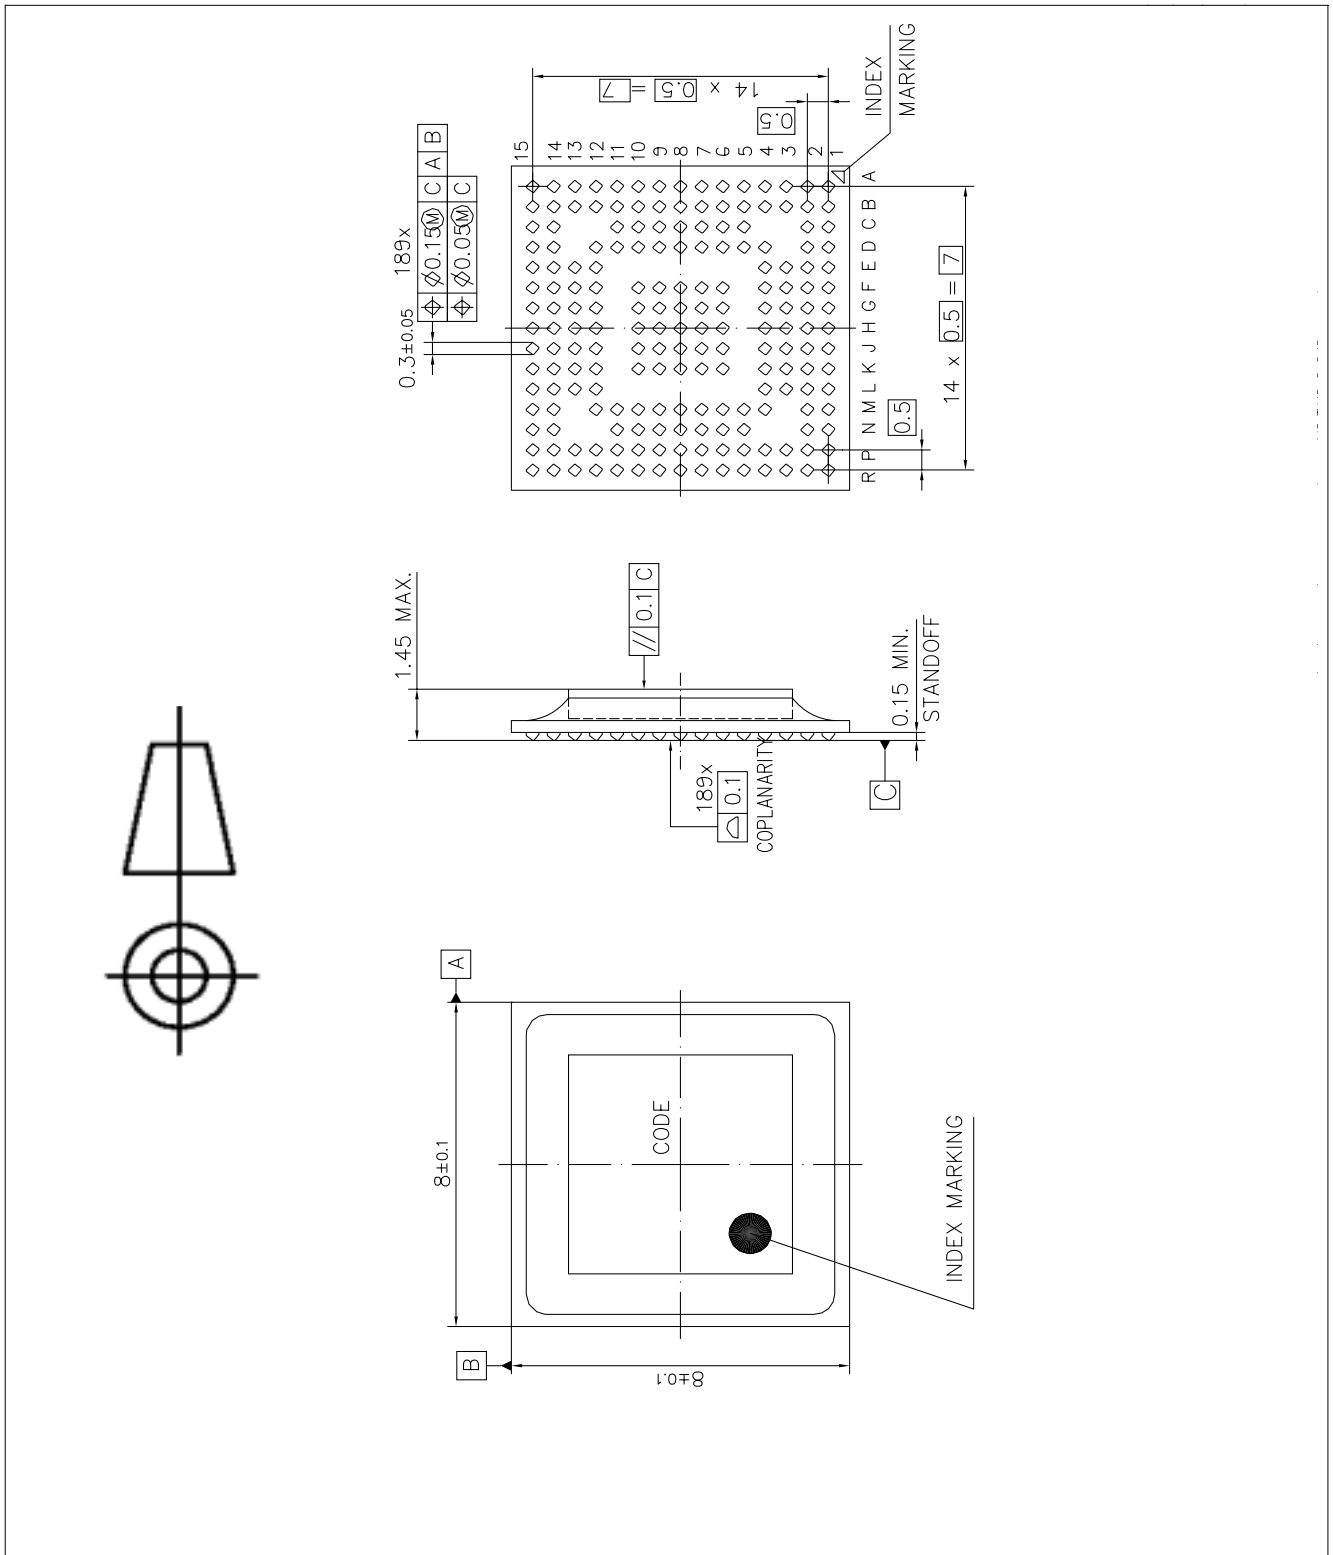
E-GOLDvoice: SG-LF2BGA-189-1 Package Details and Ball Labelling
